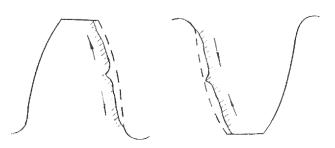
Wear profiles on plastic gear flanks for (a) the driver and (b) the driven gears.
